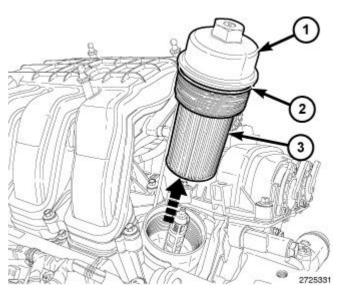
Oil Filter Cap, O-Ring Seal & Oil Filter Courtesy of CHRYSLER GROUP, LLC
